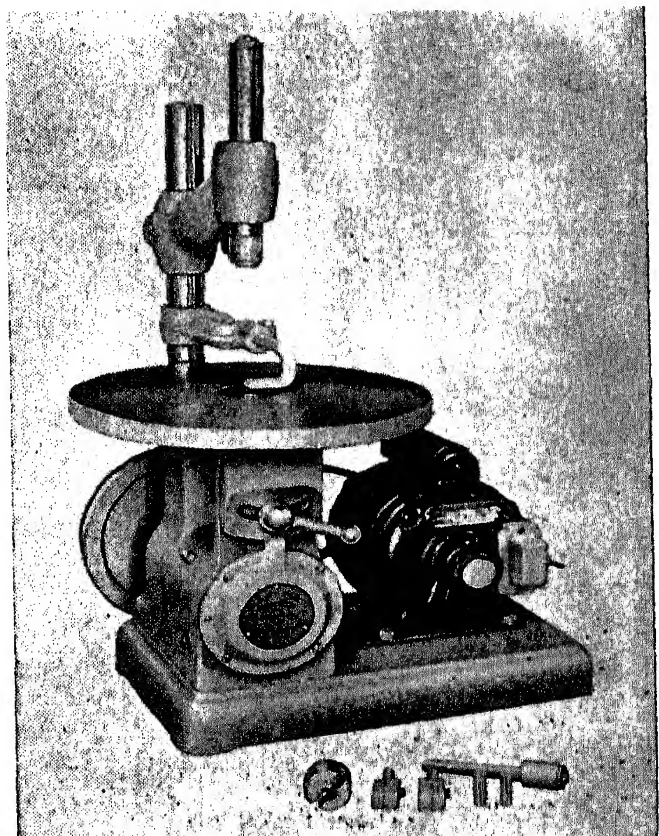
A die filing machine with a 1½ in. stroke and 12 in. diameter table. (Courtesy Illinois Tool Works.)
